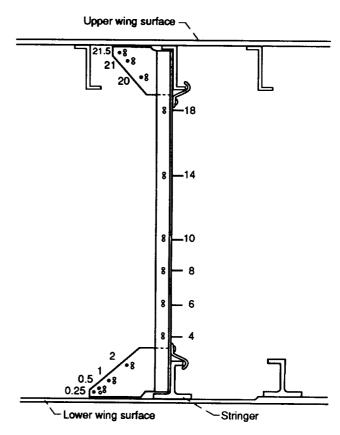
Outboard tank 2R thermocouple rake mounting.
